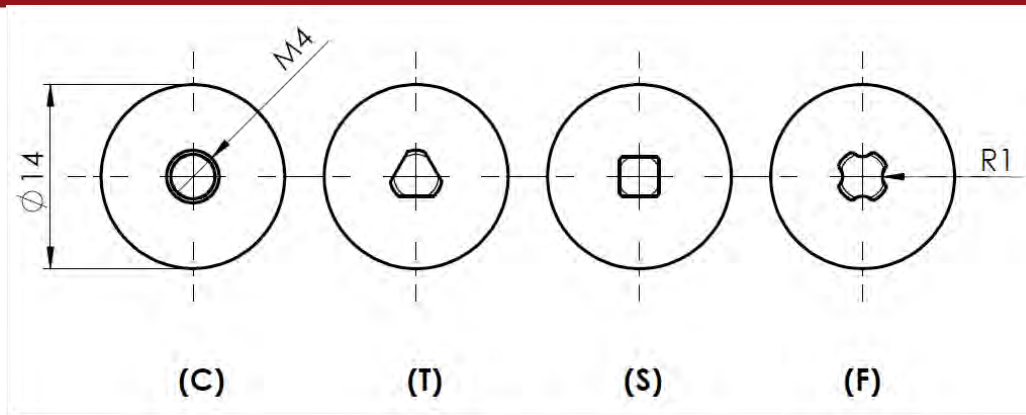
Tool geometries: (C)-cylindrical, (T)-triangular, (S)-square, (F)- cylindrical with flutes
